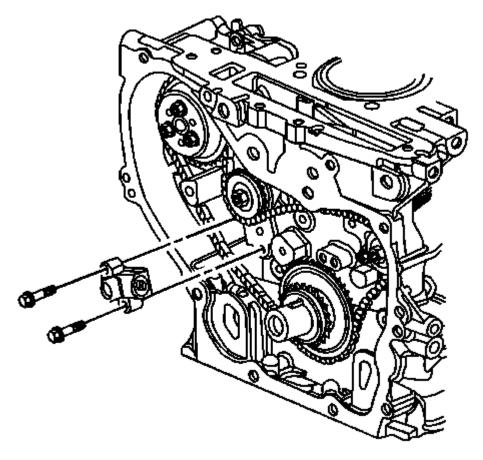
Adjustable Balance Shaft Chain Guide Courtesy of GENERAL MOTORS CORP.
